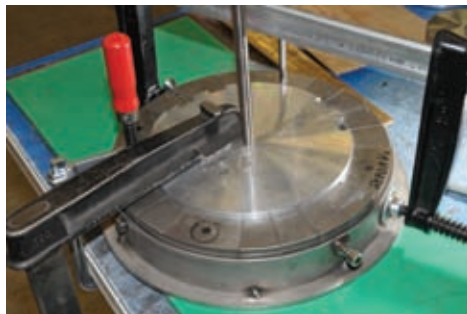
The outer magnet is also assembled from five 50 mm long identical pieces. Here the magnets are being fixed while one of the five identical pieces is assembled.
